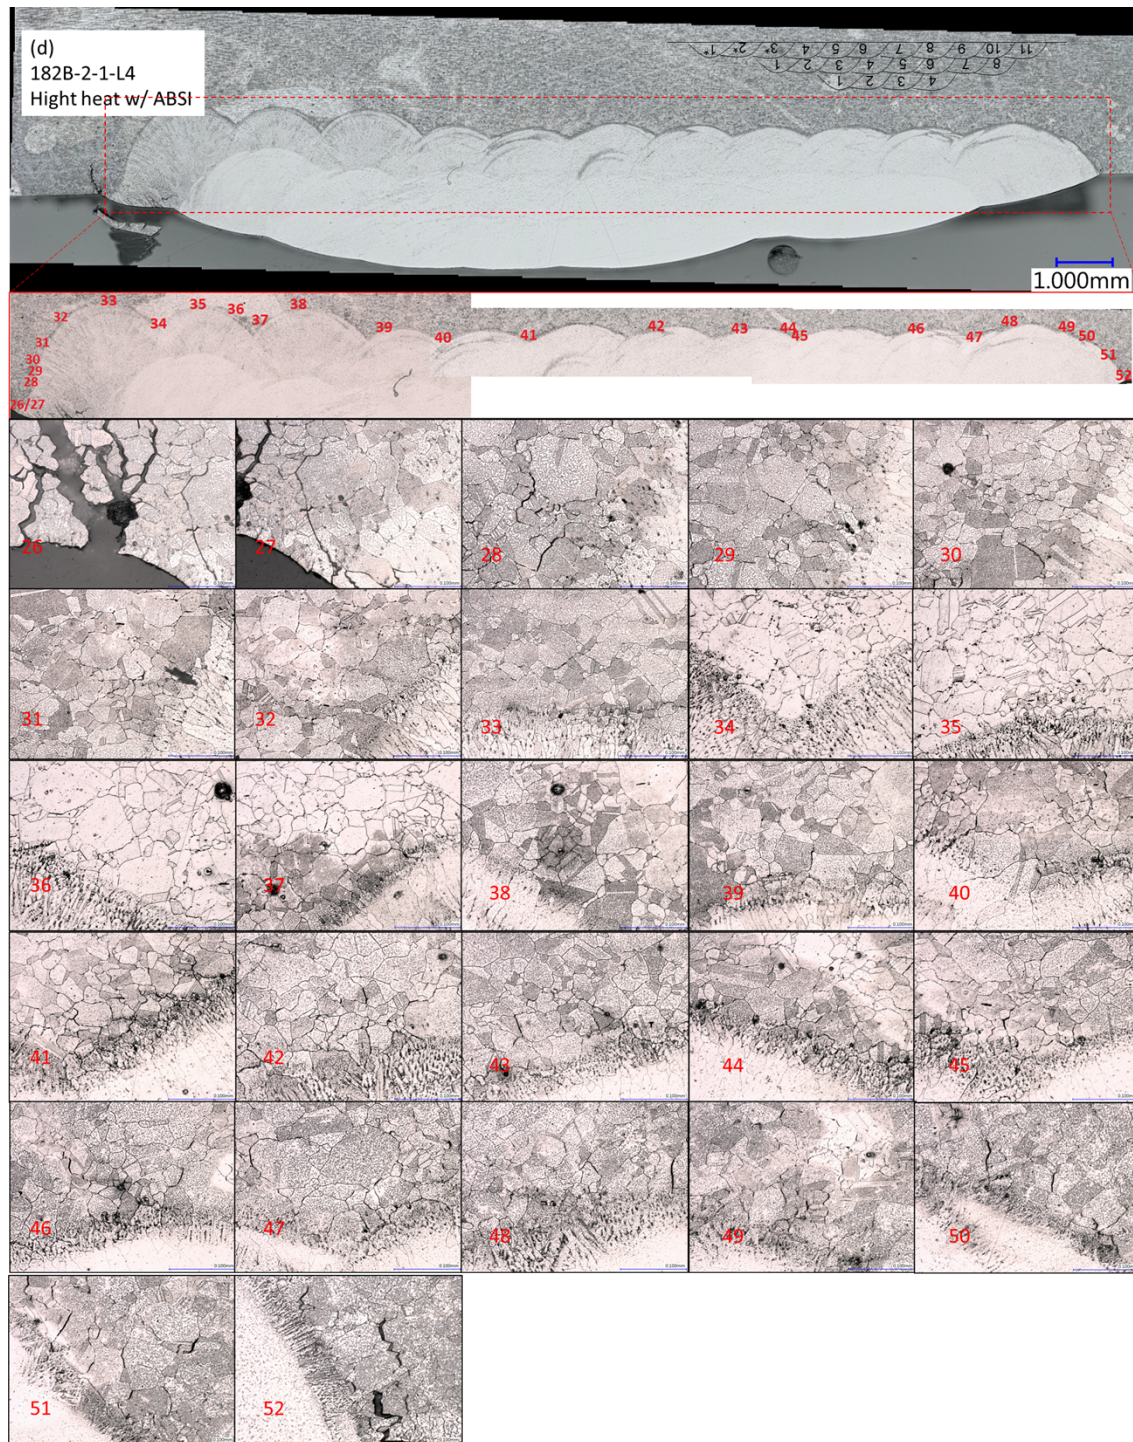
shows the cross-sections of the multi-pass weld clads performed on the coupon with 5 wppm B using 4 different welding conditions as listed in Table 3. With the welding condition of low heat input without ABSI (Figure 6a), a small crack occurred on the left side of the first weld pass in the first clad layer. The detail can be seen in the high-magnification image (labeled as “1”) at the corresponding location. Grain boundary degradation was observed through the rest of the HAZ (a list of images labeled from “2” to “25” in Figure 6a). When ABSI is incorporated, the same amount of heat input condition also yielded a small crack at the toe of the entry weld pass (Figure 6b). Note, this crack could also possibly be a result of the insufficient gas shielding during the laser welding operation as mentioned before (insufficient shielding gas for passes 1-4 in Layer 1 of clad L2 on 182B-2). Interestingly, the tendency of grain boundary degradation seems reduced with ABSI, which is consistent to our previous studies on the stainless steels (Chen, 2021). For the high heat input condition with and without ABSI (Figure 6c and Figure 6d), cracks were also observed on the entry side of the weld toe in both cases, and ABSI seems helpful to reduce the gran boundary degradation. The reason why the cracks mostly occurred at the toe of
